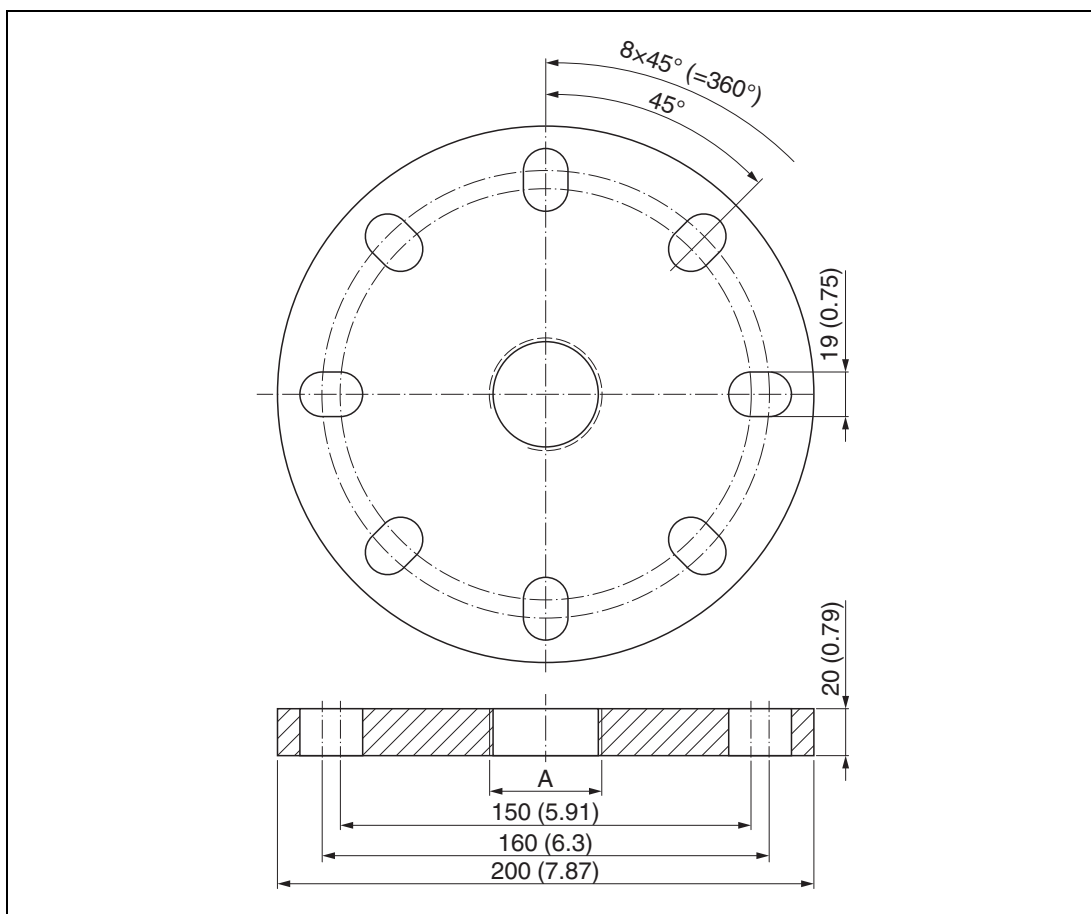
Dimensions of UNI flange 3 inch/DN80/80, engineering unit: mm (inch)
